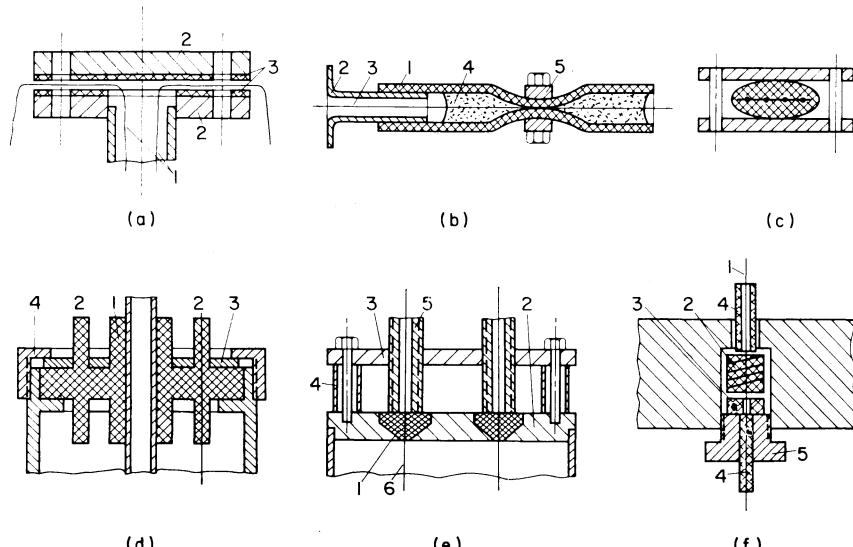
Gasket seals of electric lead-through wires: (a) using a flat rubber gasket: (1) electric lead; (2) flanges; (3) rubber gasket; (b) with a clamped rubber tube (1); (2) glass or metal tube; (3) electric lead; (4) vacuum grease; (5) clamp. After Fuschillo⁴¹⁷ (*Courtesy of The Institute of Physics and The Physical Society, London*); (c) cross section of seal b; (d) cylindrical seal, (1) rubber; (2) lead wire; (3) compression plates; (4) compression nut; (e) conical gasket seal, (1) gasket; (2) base plate; (3) support plate; (4) spacer; (5) compression screw; (6) lead wire. After Stamper¹¹⁷³ (*Courtesy of The American Institute of Physics*); (f) rubber spiral seal; (1) lead wire; (2) Neoprene spiral; (3) insulating spacer; (4) insulation sleeve; (5) compression screw. After Prior¹⁰¹¹ (*Courtesy of The Institute of Physics and The Physical Society, London*)
